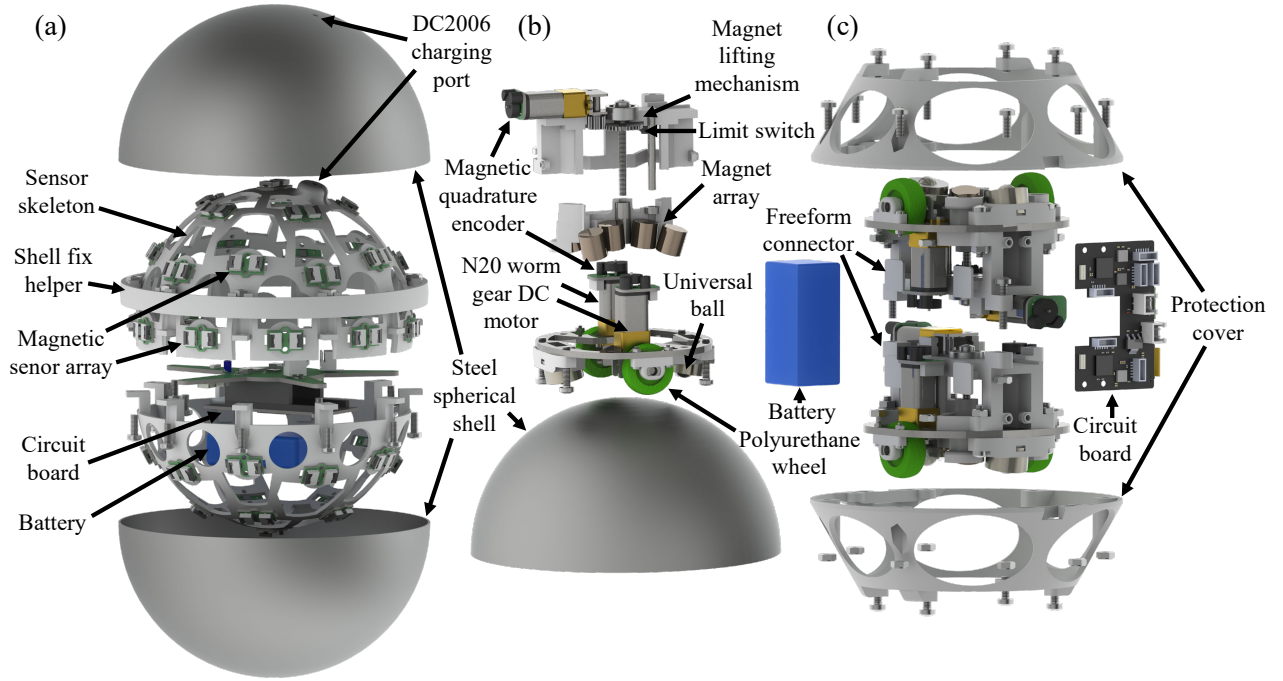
The mechanical design of the FreeSN modules. (a) Node module. Exploded view. (b) Freeform connector. Exploded view. Partial section view. (c) Strut module. Exploded view.
